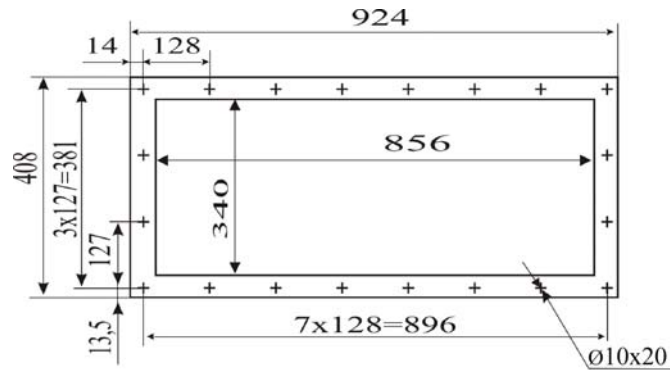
Flange of clean air outlet of filters DCF-4; DCF-8; DCF-12 and DCF-16
